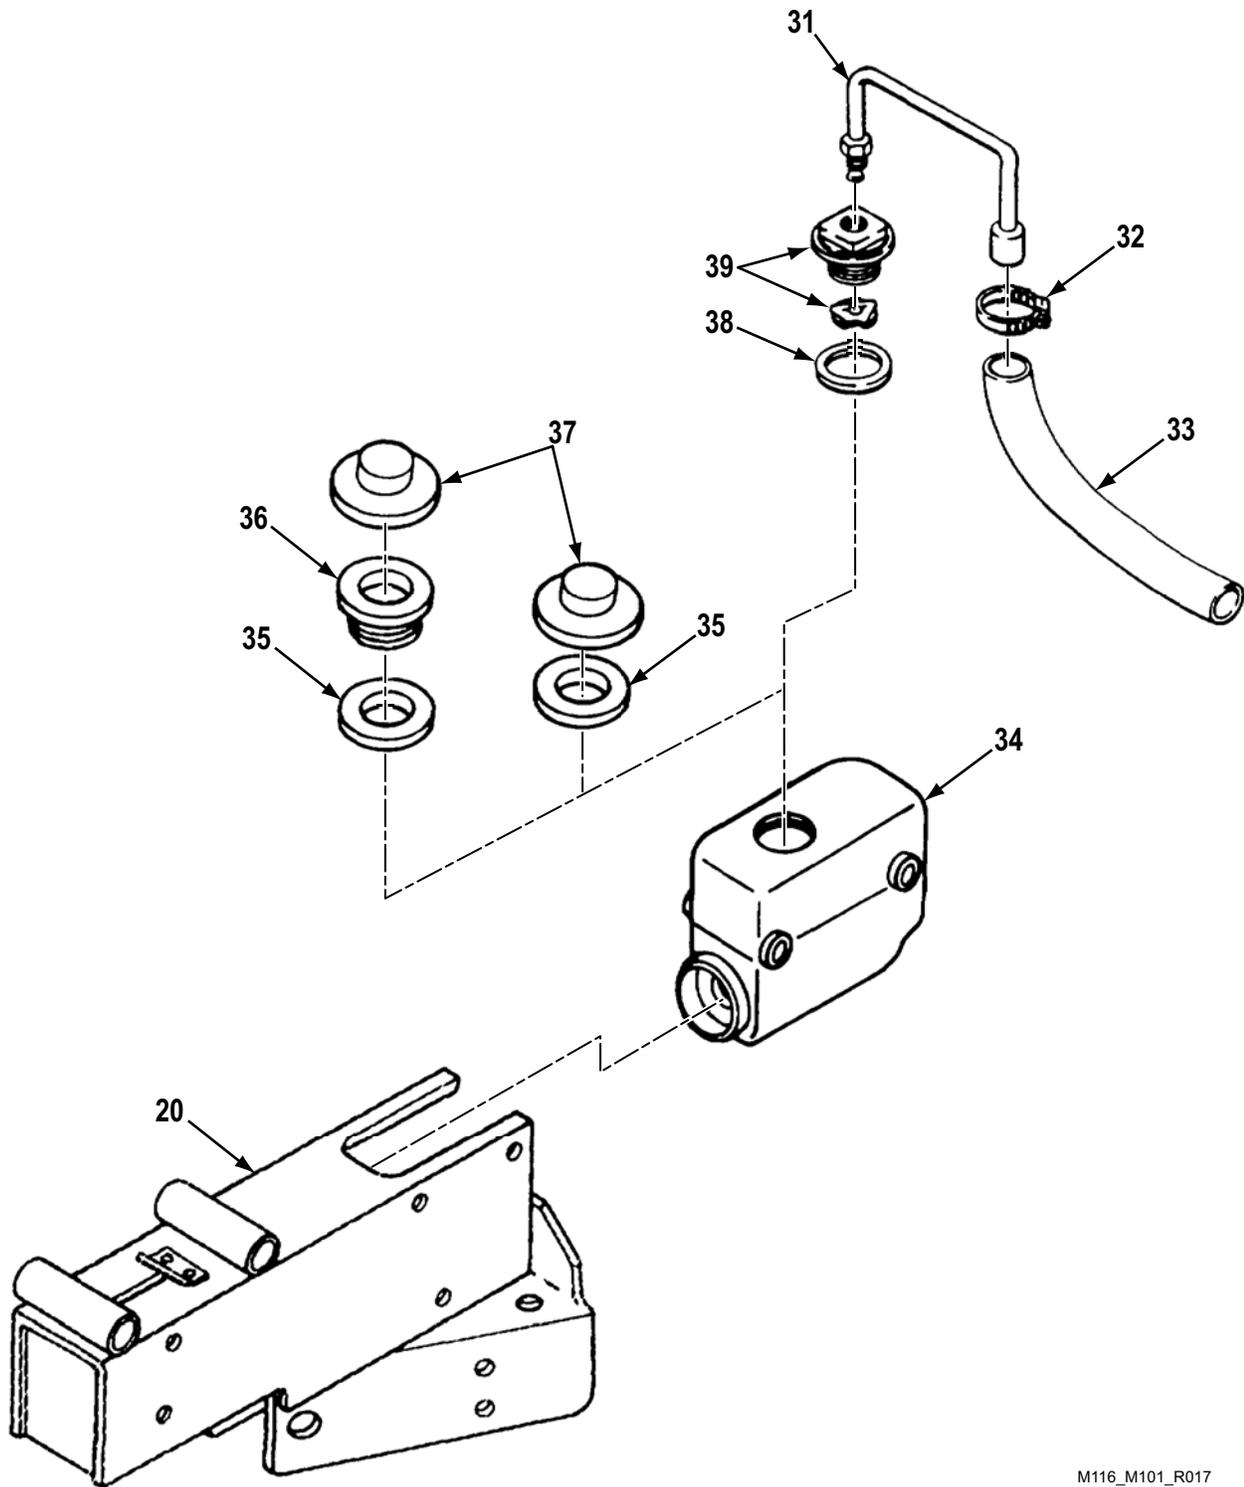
Hydraulic Brake Actuator Assembly, Surge. (Sheet 1 of 2)
